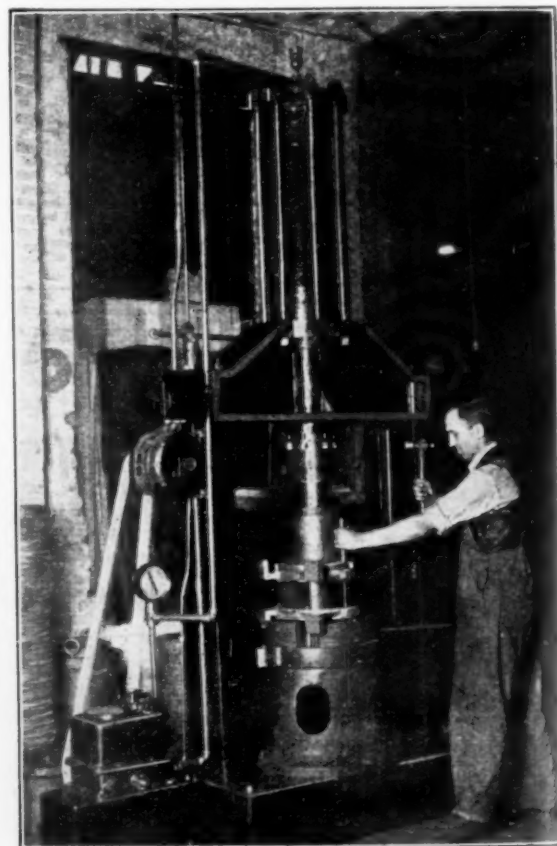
HYDRAULIC PRESS OPERATED BY OILGEAR PUMP
